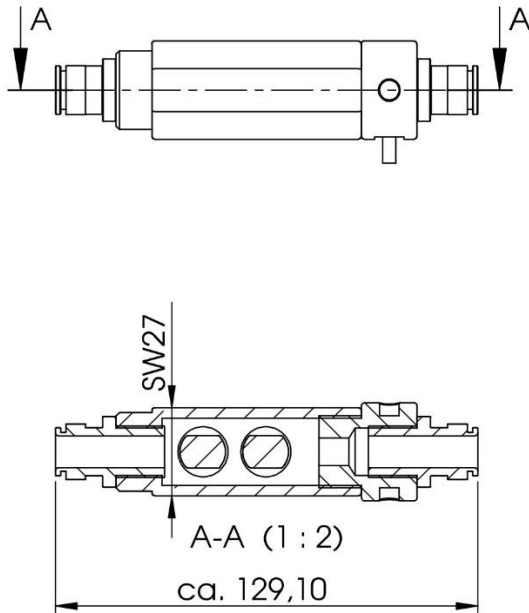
Sectional view KTSiOx-XX & KTSiSx-XX
